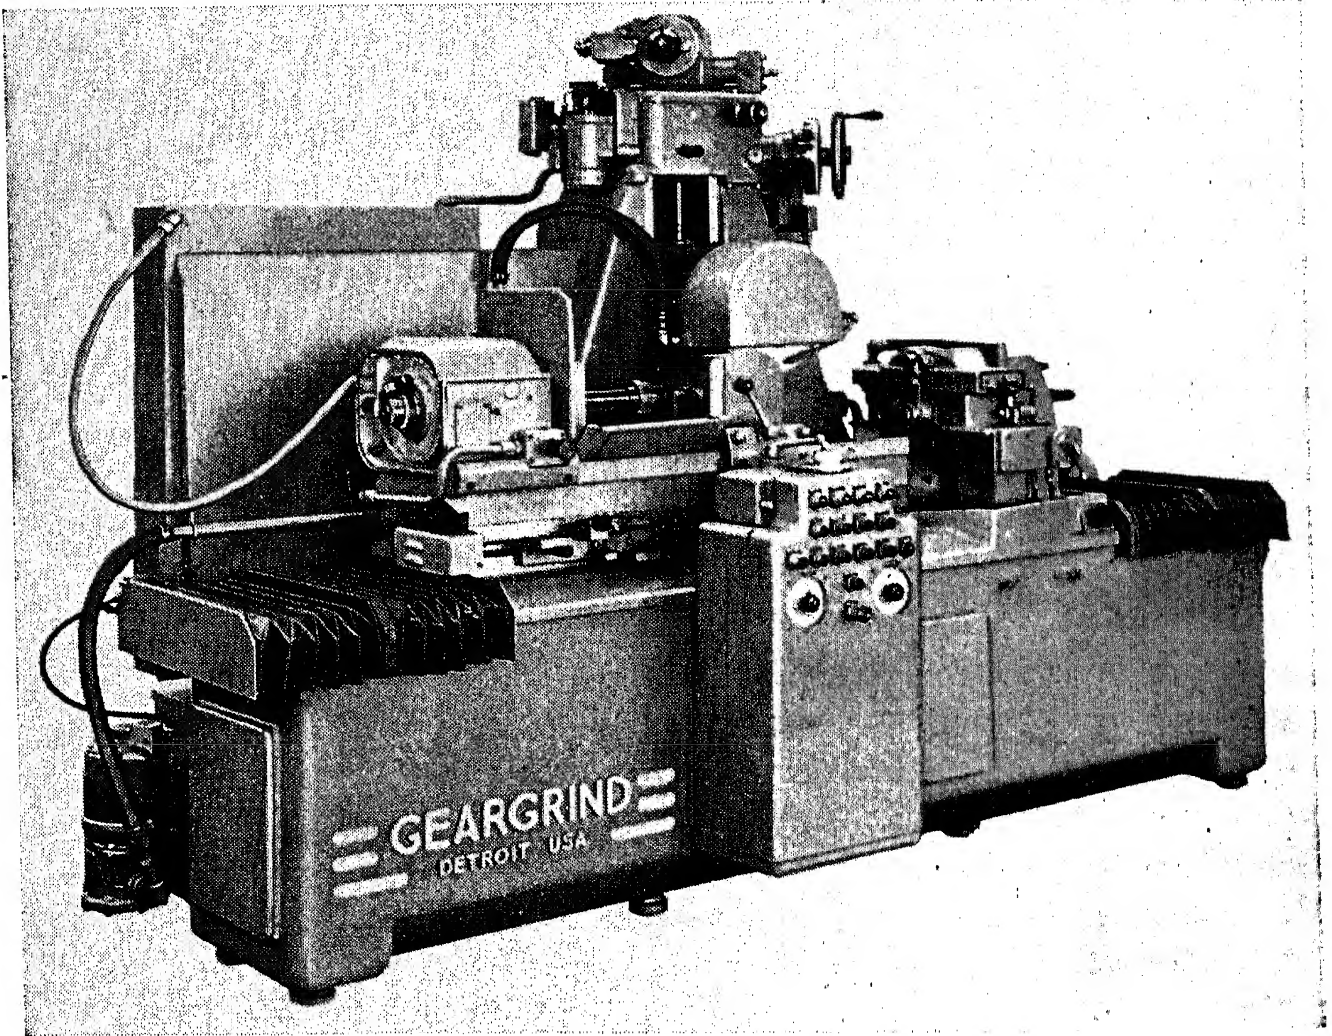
A 10 in. by 24 in. formed wheel gear grinding machine.
